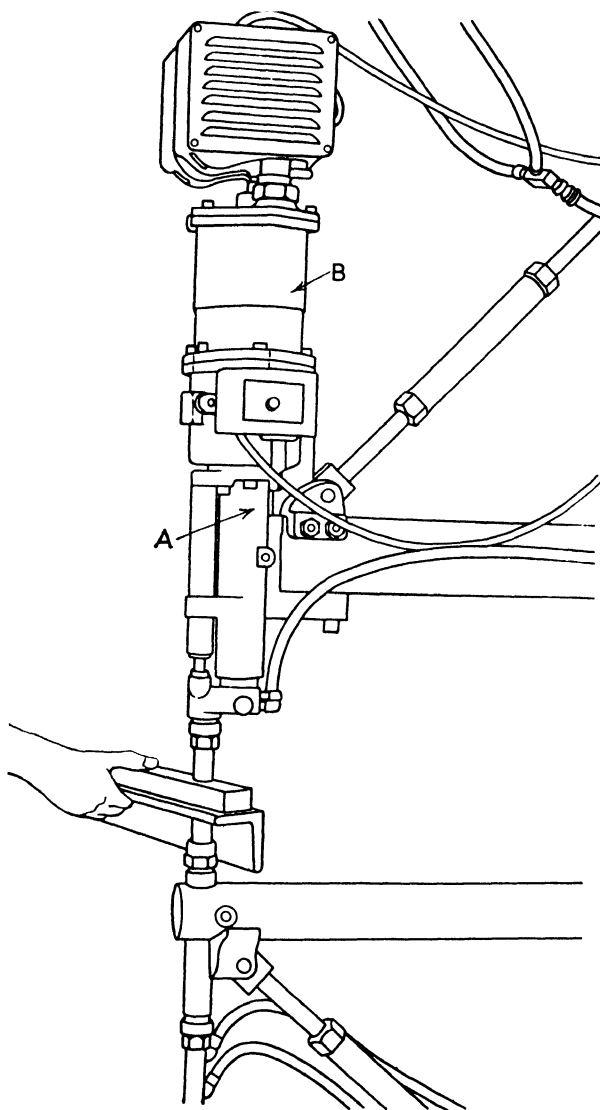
Illustrating the setup for the new process of resistance forge welding. With this equipment heavy sections of steel and iron can be firmly attached to one another.
